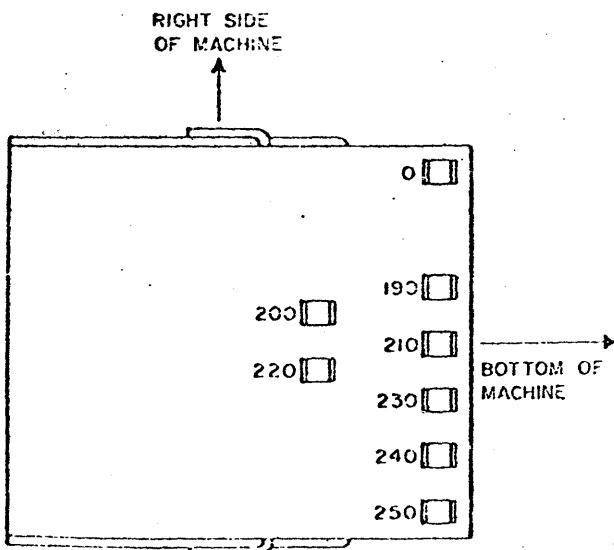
Fuser Transformer T1 Taps (Bottom View)
